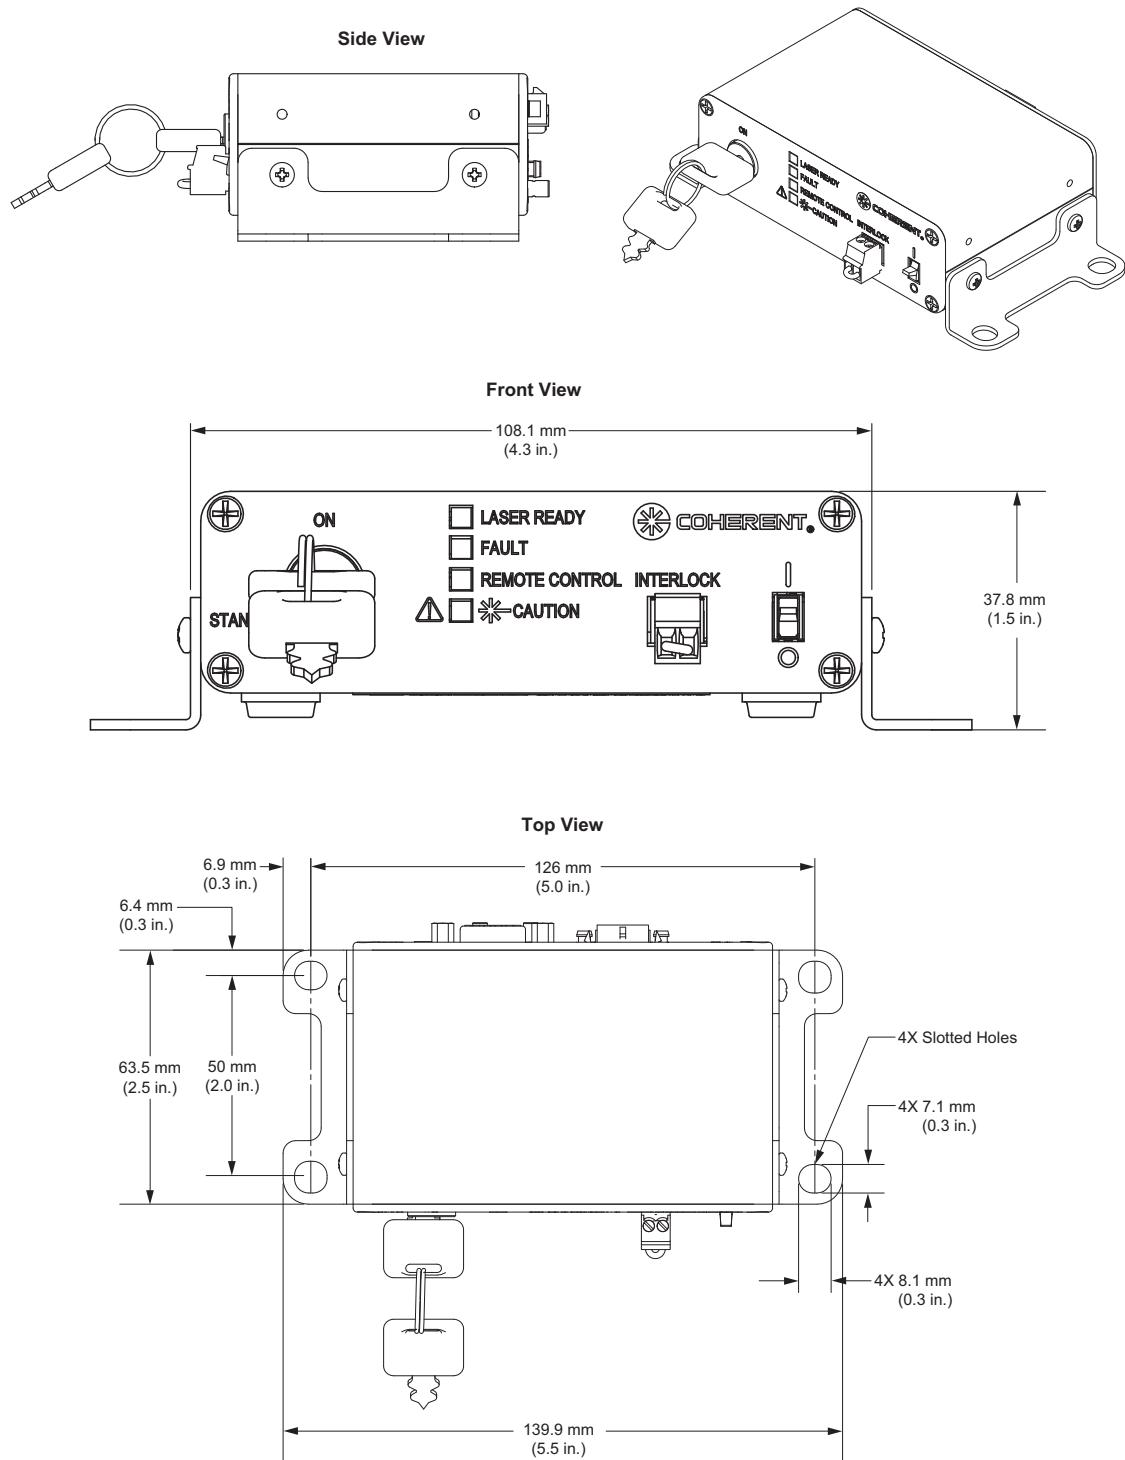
OBIS Remote (With Mounting Brackets) Dimensions
